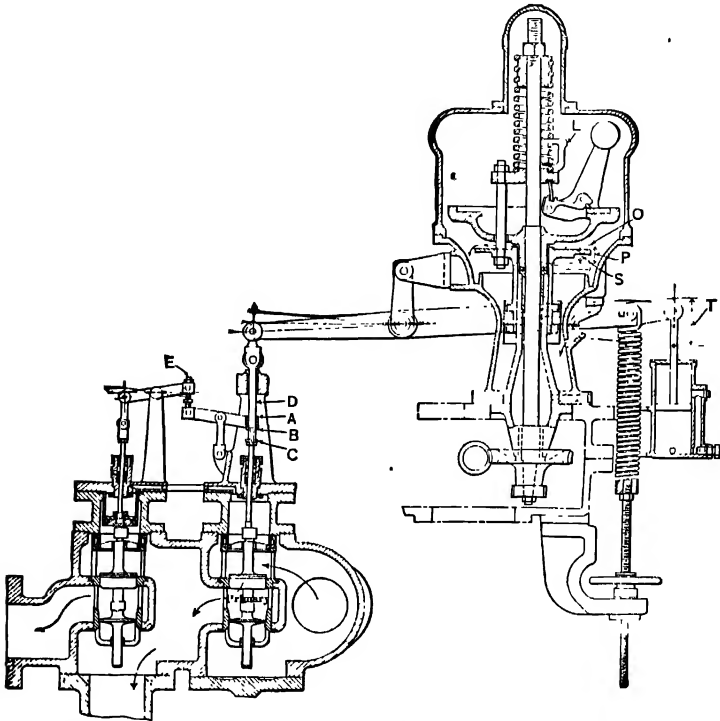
Assembly of Governor Mechanism, Direct Control.
